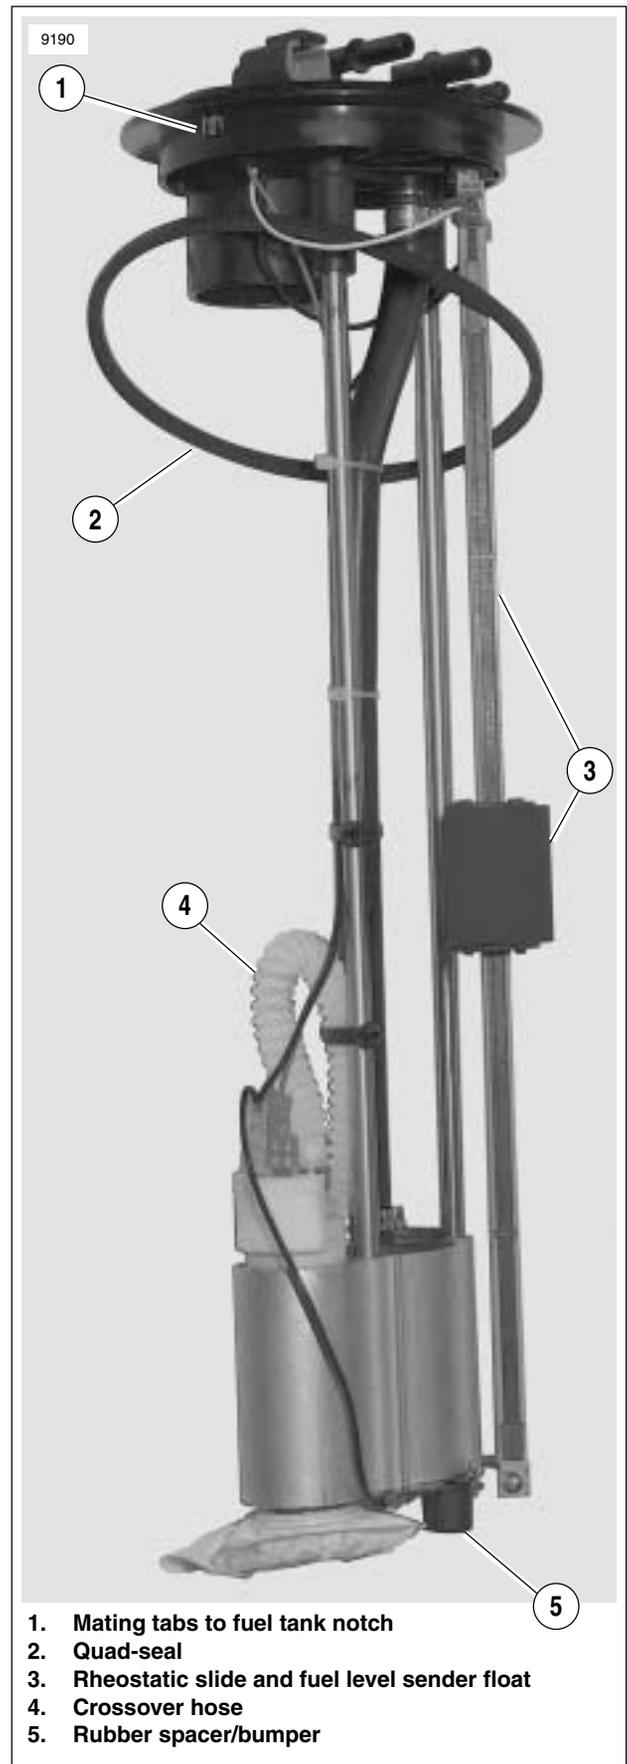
Fuel Pump/Filters/Fuel Level Sender Assembly
